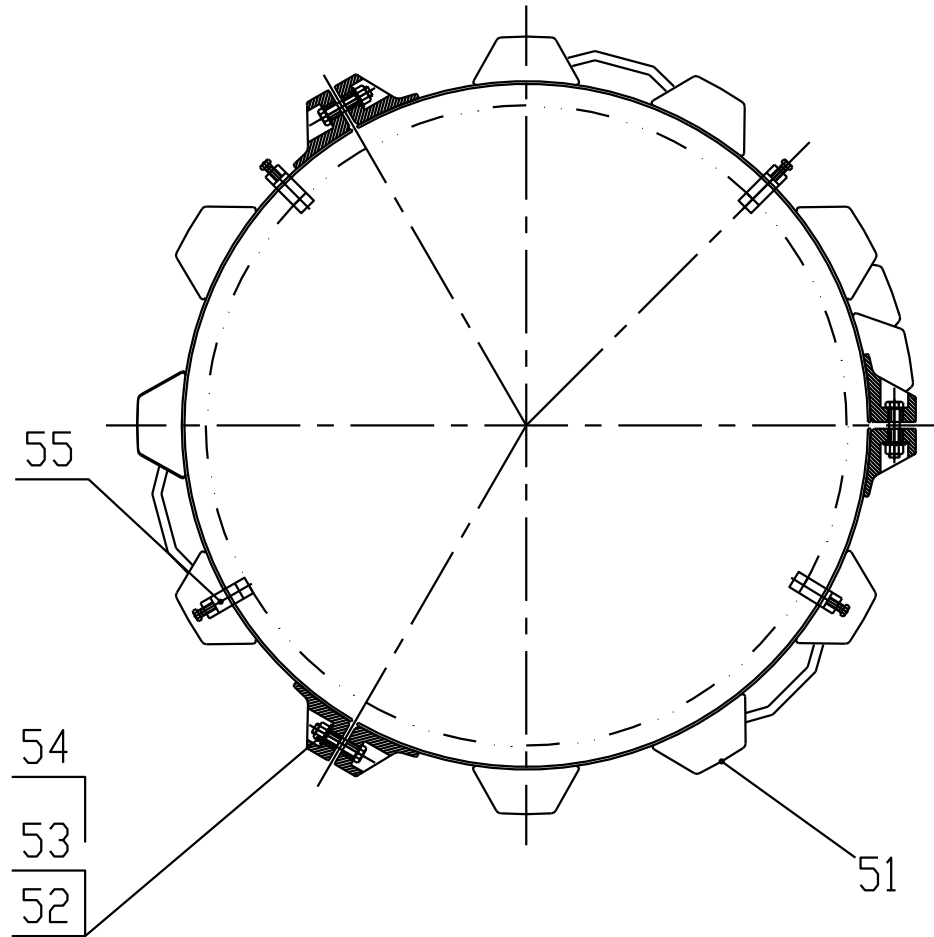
Gibbous drum assembly 凸块轮总成			Remarks
